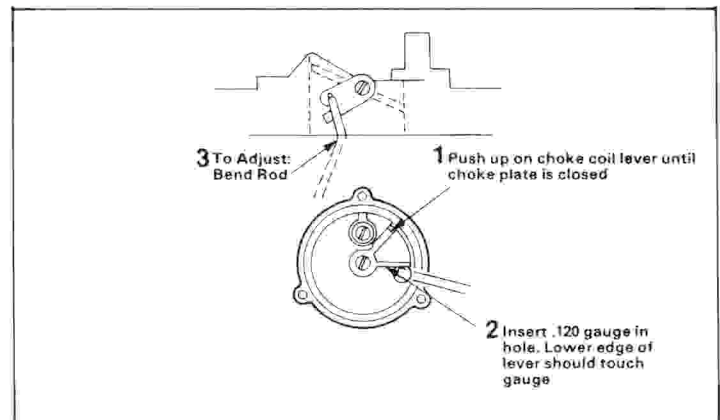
CHOKE COIL LEVER ADJUSTMENT
